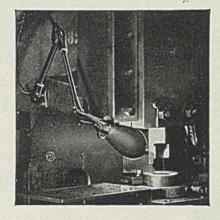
Flexibility, a desirable feature for machine lamp fixtures, is obtained by employing two arms with ball and socket joints
